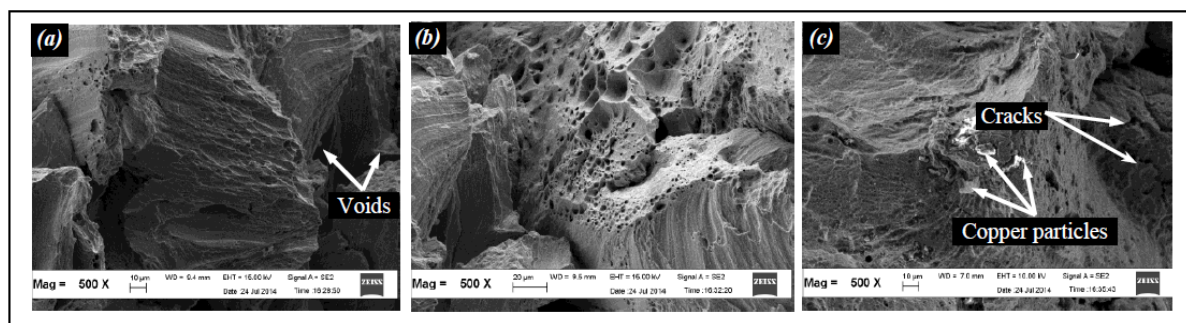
FESEM images showing a tensile fracture surface mode of FSW dissimilar aluminium-copper joints; (a) 1000 rpm, (b) 1750 rpm and (c) 2000 rpm.
